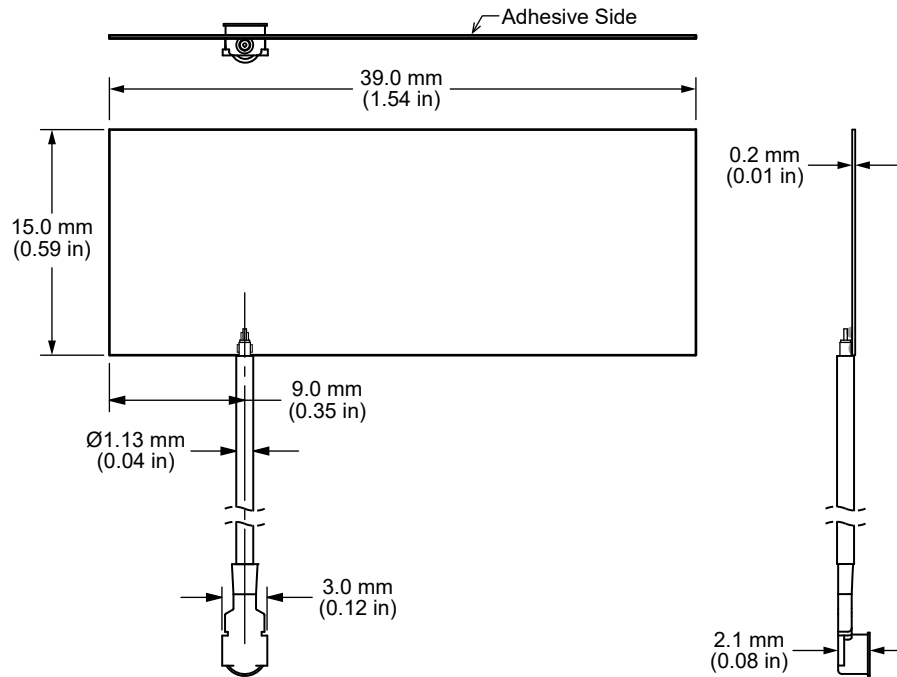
ANT-5GLFPC1-UFL-100 Dimensions
